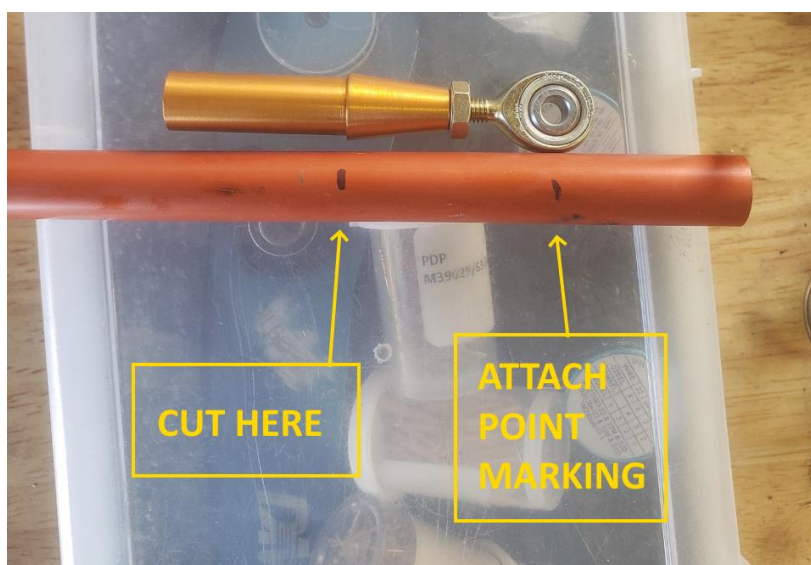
PUSH PULL TUBE TRIMMING
